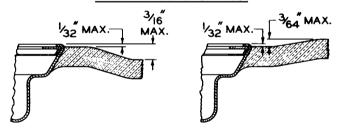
DETAILS OF RECESSED SMALL CAVITY CAP & BULB ASSEMBLY
